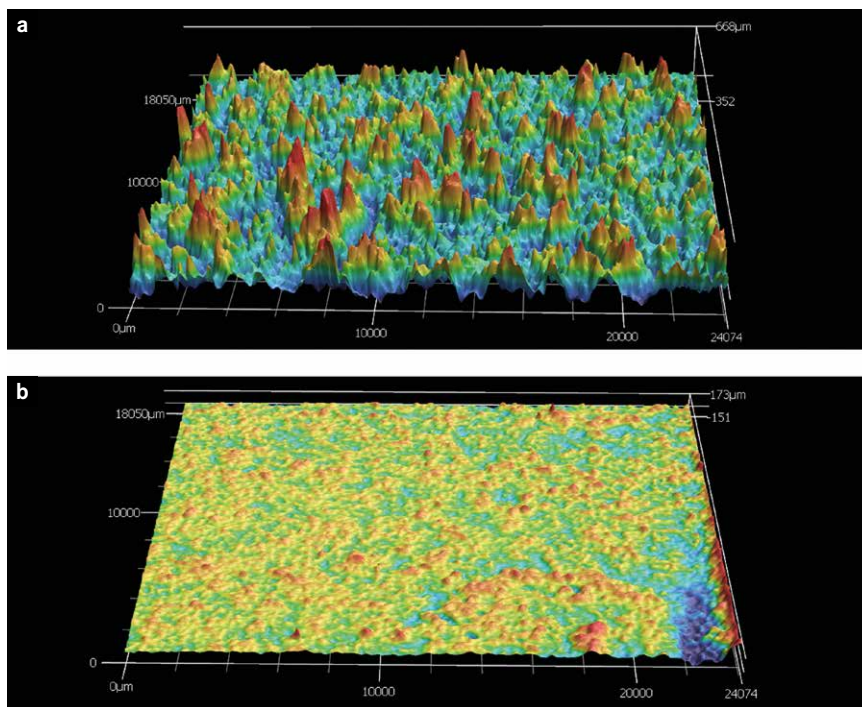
Inner surface of the casting (explosion-proof instrument housing) after removing the coated sand core.
